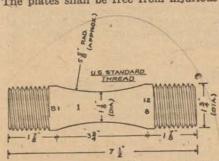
Standard form of test specimen required for tension tests of gray iron castings.
